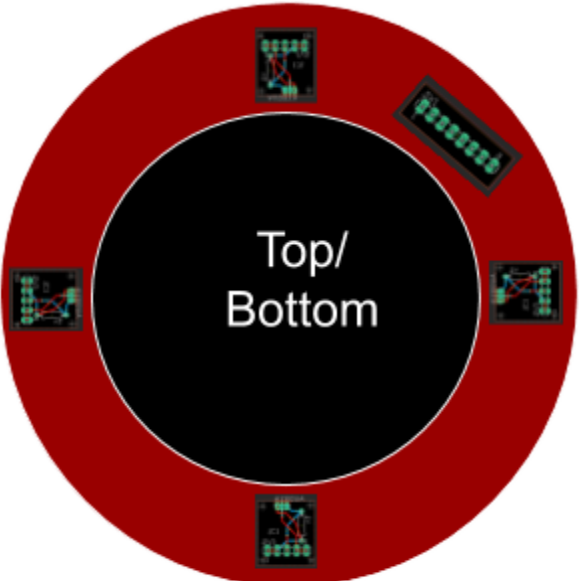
Square PCB and Output Pins on Plastic Ring Mount
